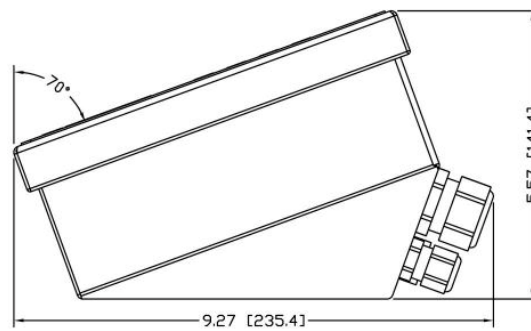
IND780 Harsh Enclosure Terminal Dimensions, Side
